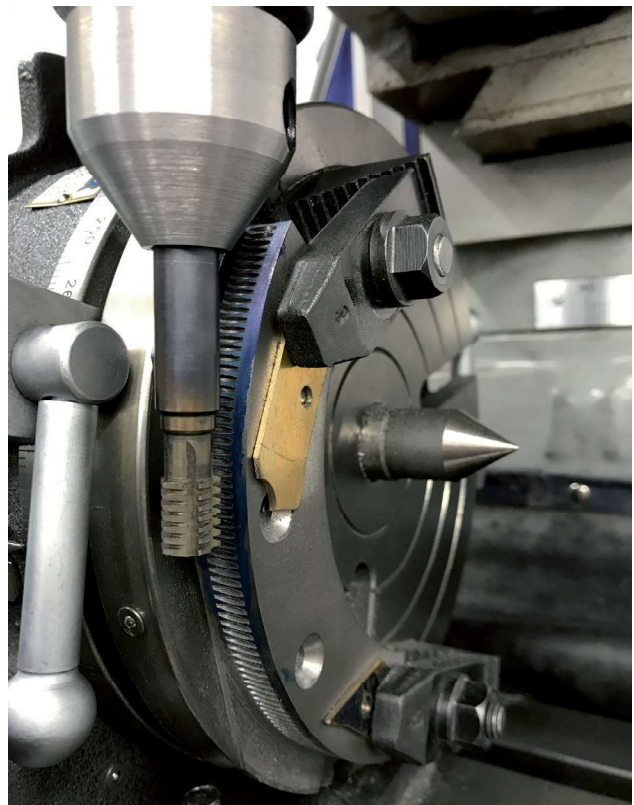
Machining the quadrant teeth with a custom made cutter
